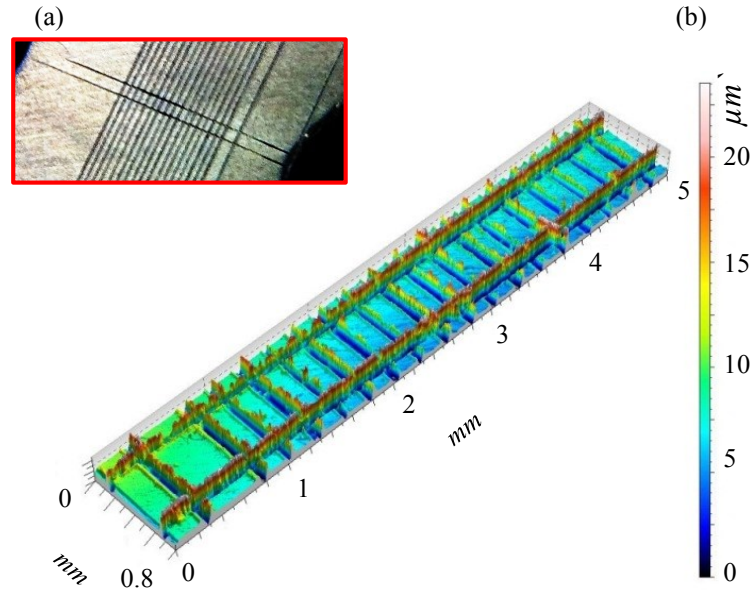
(a) The test part with fine scratches, and (b) 3D scanned surface of the fine scratches on the test part.
